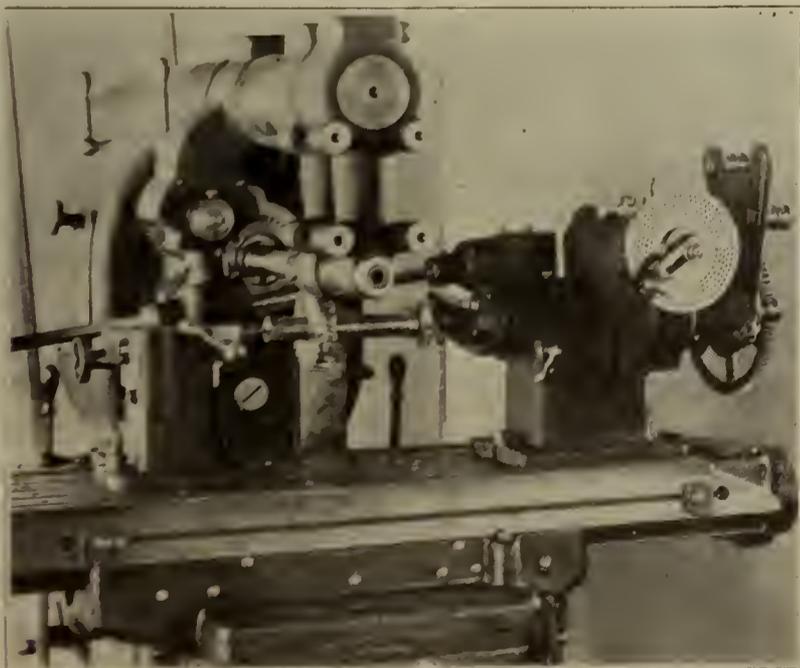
SHOWING METHOD OF CUTTING A COARSE PITCH WORM OR SPIRAL GEAR.
